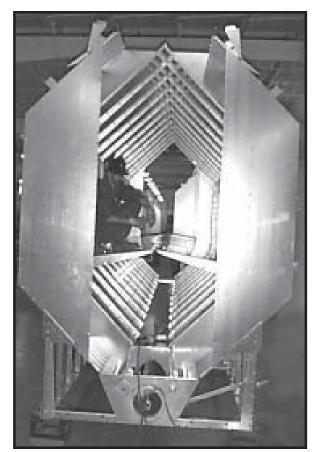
Bottom plenum divider installed in 22', three-fan dryer.
